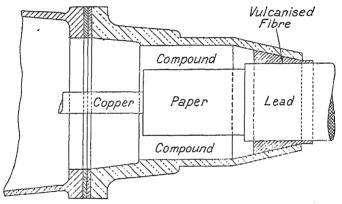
Sheath Bushing for E.H.T. Terminal Bell.
